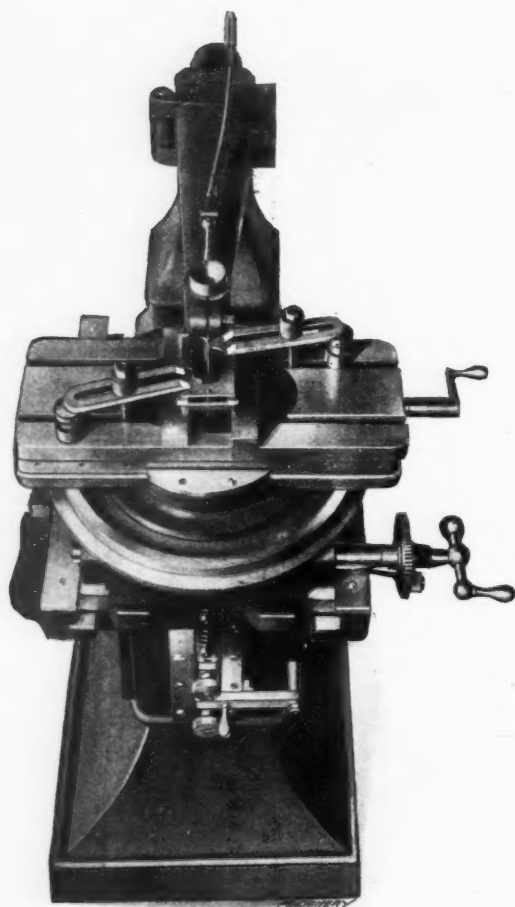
View looking down on Machine, which shows Construction of Universal Table
